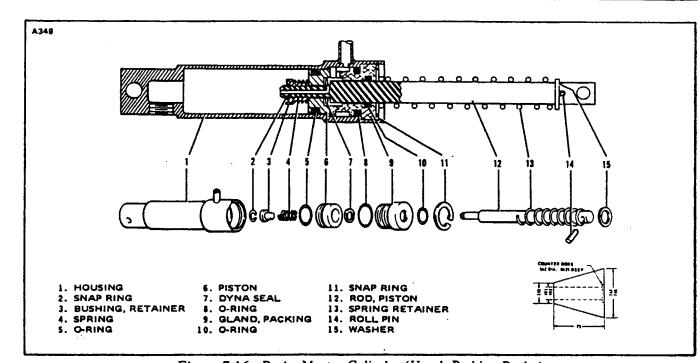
Brake Master Cylinder (Hand, Parking Brake)
